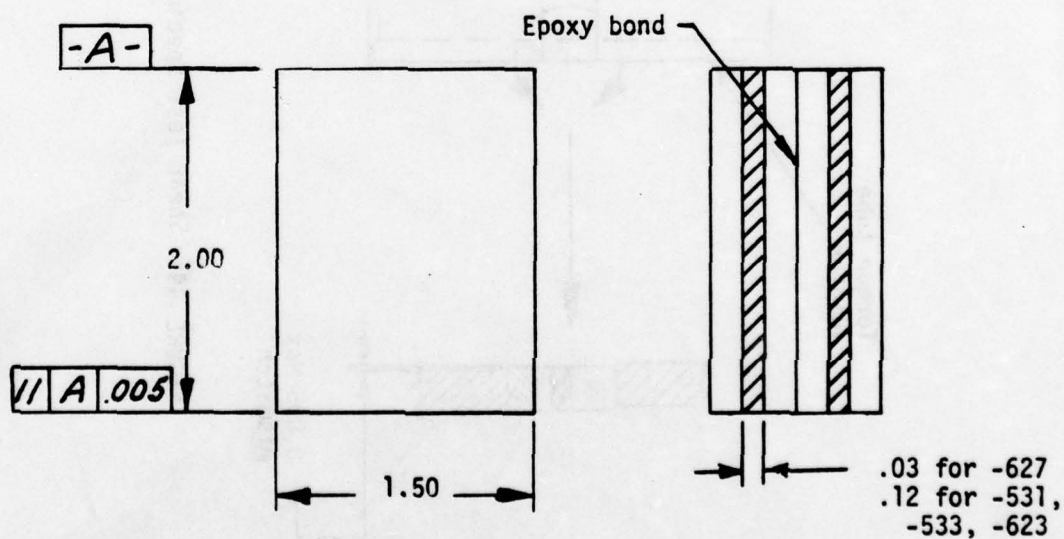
Shear Test Specimen (Z7942633-531, -533, -623, -627).
